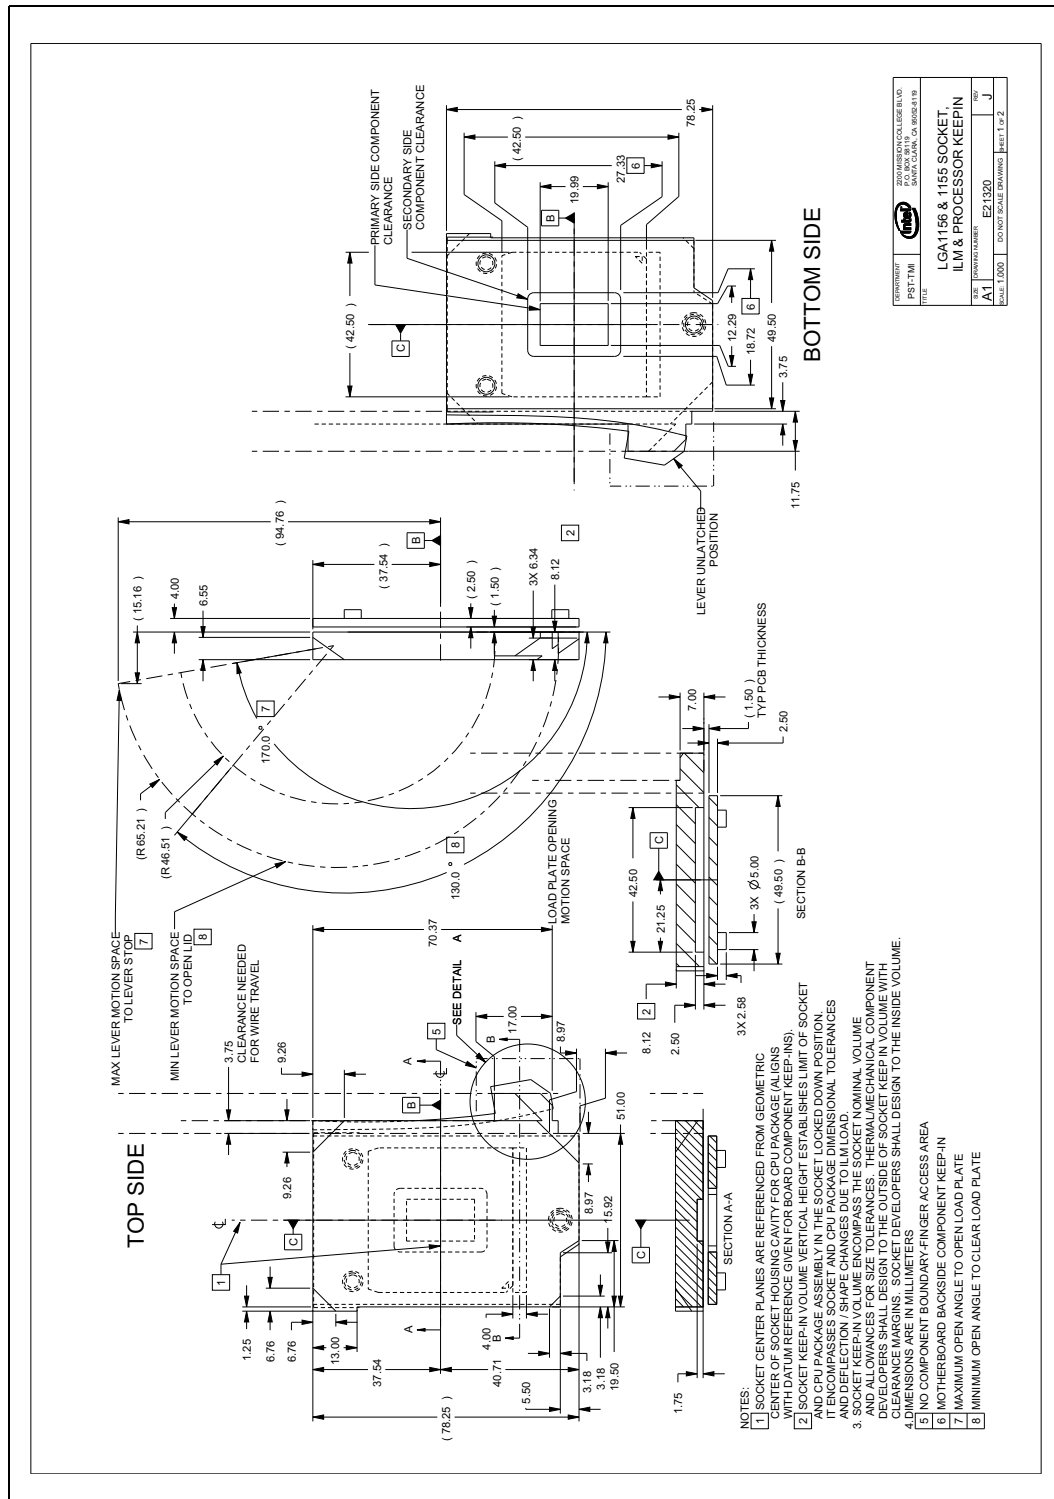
Socket / Processor / ILM Keepout Zone Secondary Side (Bottom)
